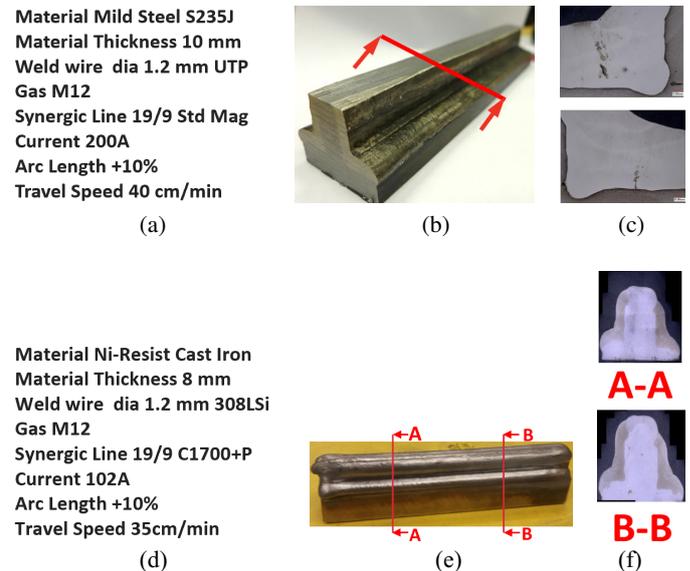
Development of process parameters for diaphragm additive repair, welding parameters used in the development phase (a), additive mockup using (a) parameters (b), cut ups of (b) printout (c), welding parameters used in the development phase (d), additive mockup using (d) parameters (e), cut ups of (e) printout (f)
